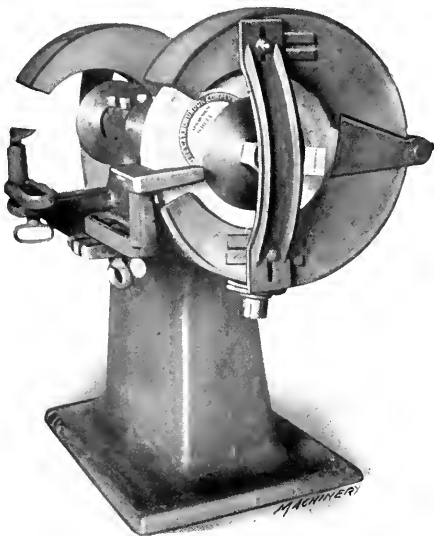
Grinding Machine equipped with Valley City Wheel Guards
